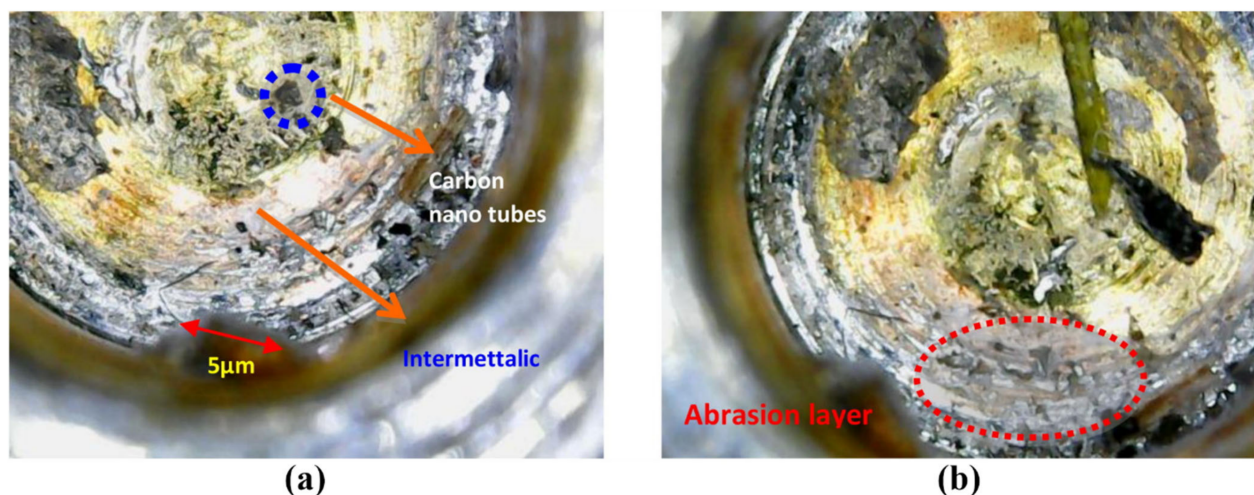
Pin surface morphology after friction stir welding of AA6061 aluminum alloy and pure copper. Formation of intermetallides (a) and abrasion marks (b) on the surface of the pin. Reprinted with permission from [321] 2020, Elsevier.
